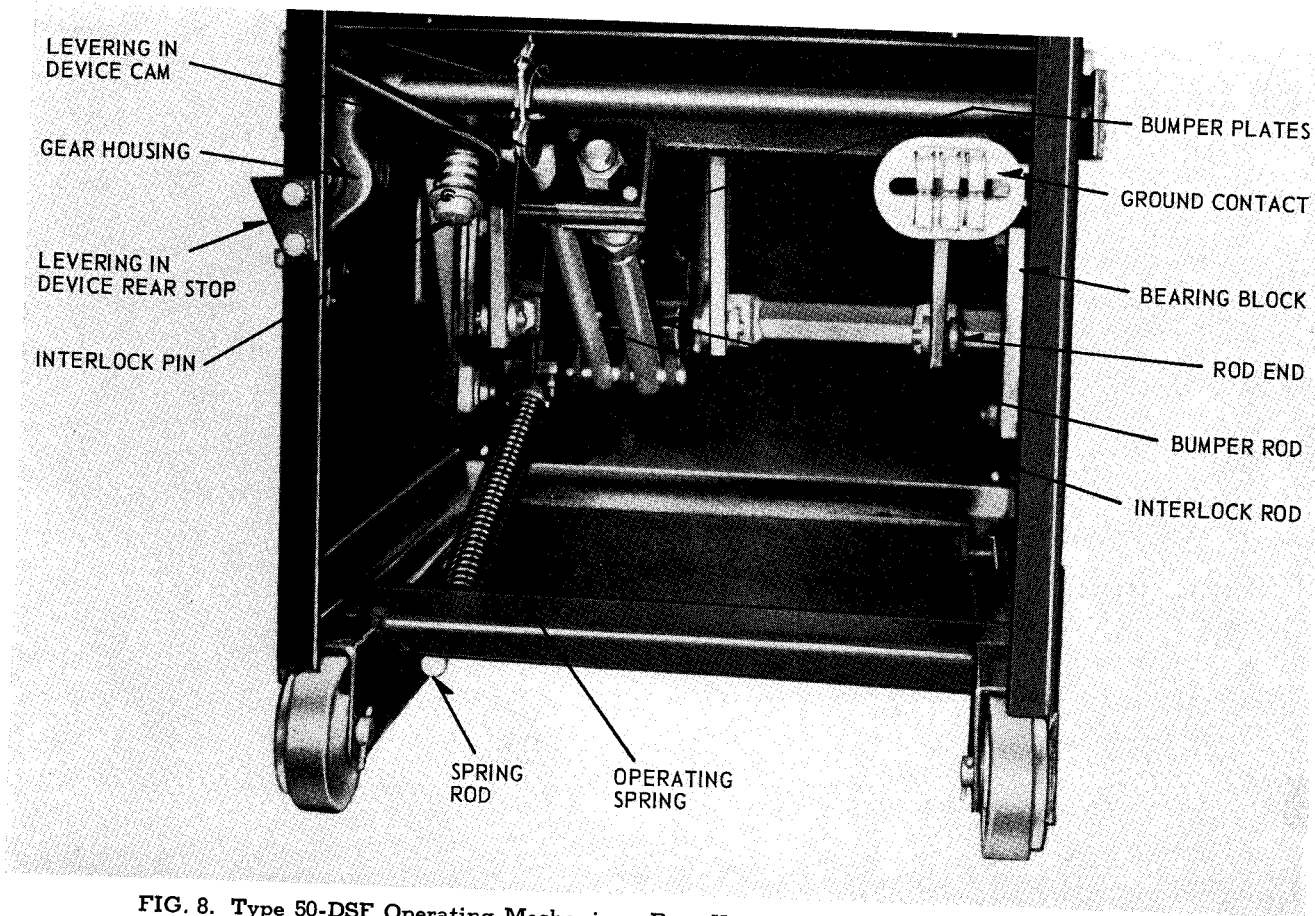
Type 50-DSF Operating Mechanism, Rear View, Switch Open and Spring Discharged
